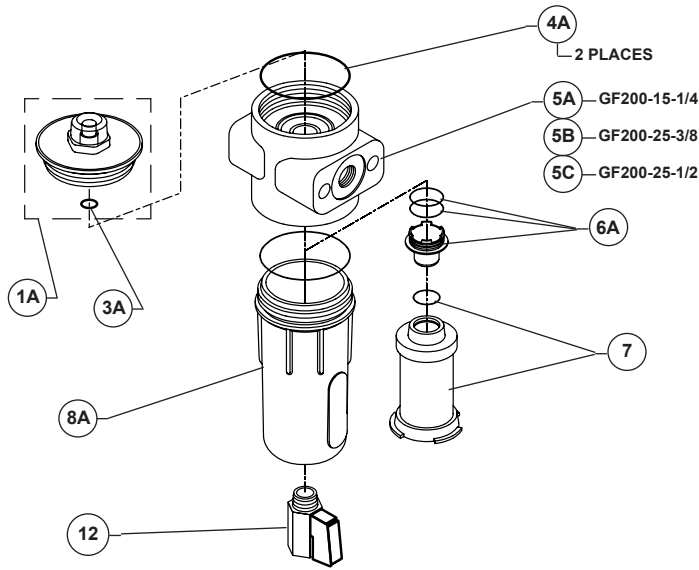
B GF200-55-1/2 THRU 500-2 REPLACEMENT PARTS
